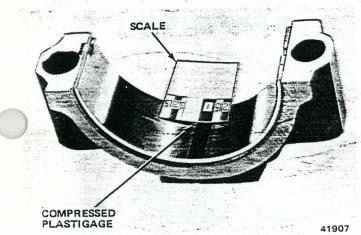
B-33 Connecting Rod Bearing Clearance Measurement with Plastigage
